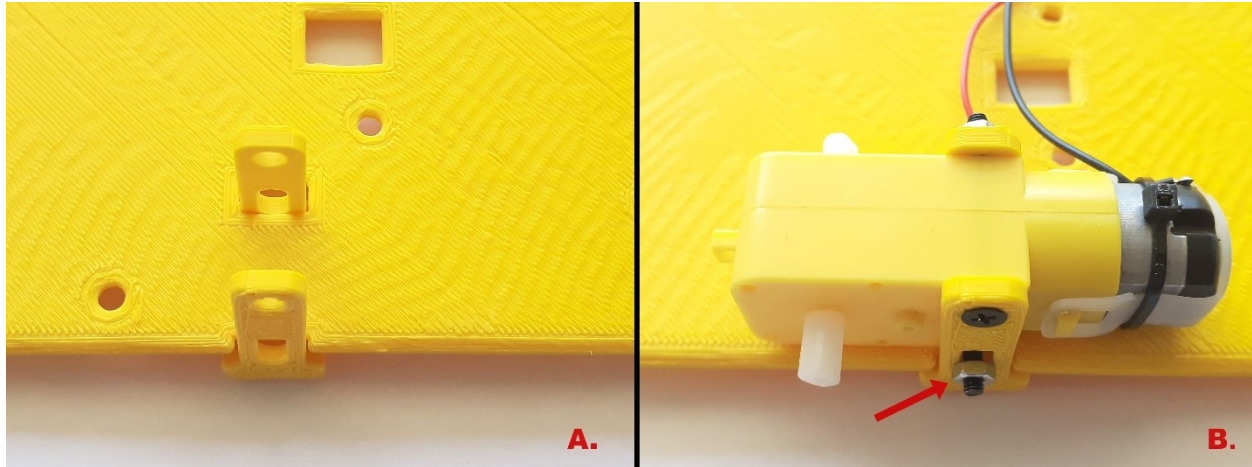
A. Placing the two fasteners/brackets on the chassis; B. Binding the DC gear motor using the fasteners, the two 30cm screws and the two nuts
